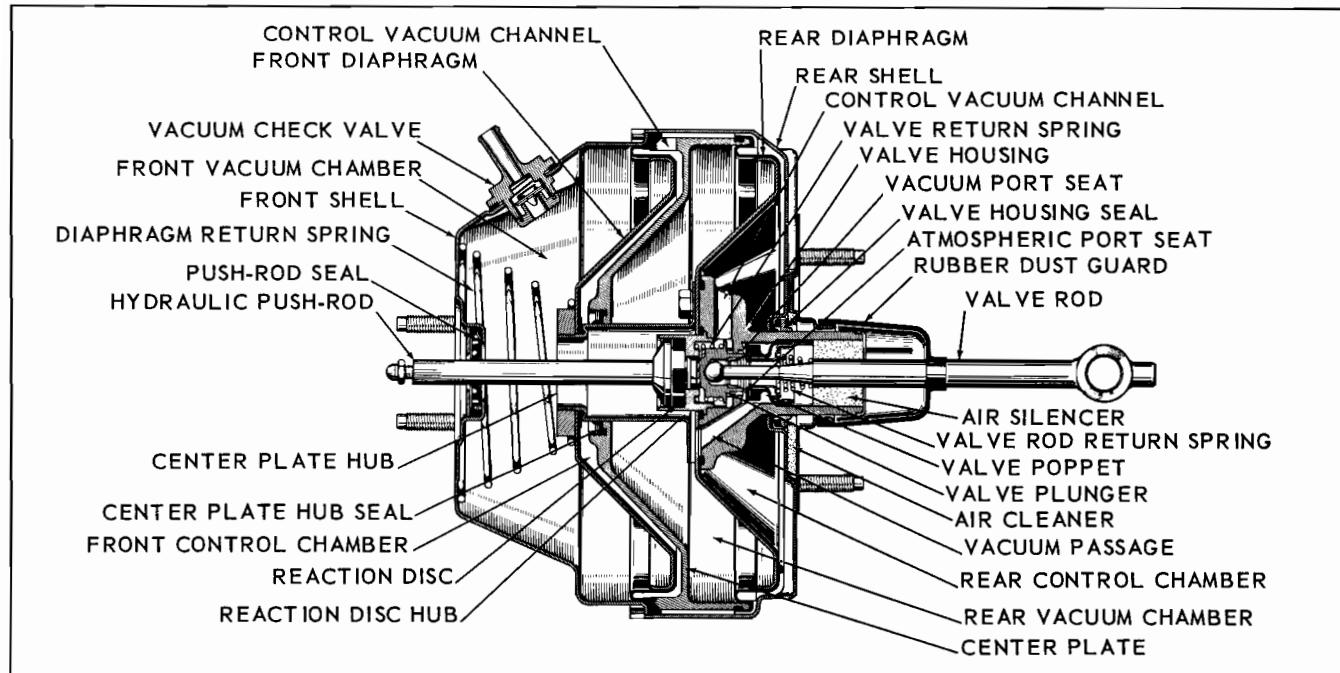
Cutaway View of Tandem Diaphragm Tandem Type Units
